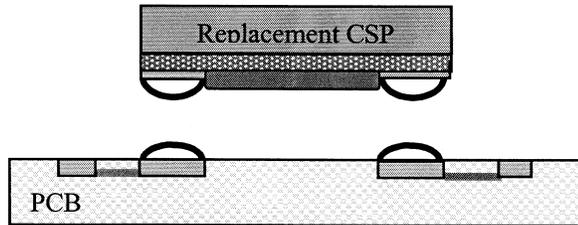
Ball attachment to replacement CSP prior to PCB mounting.
